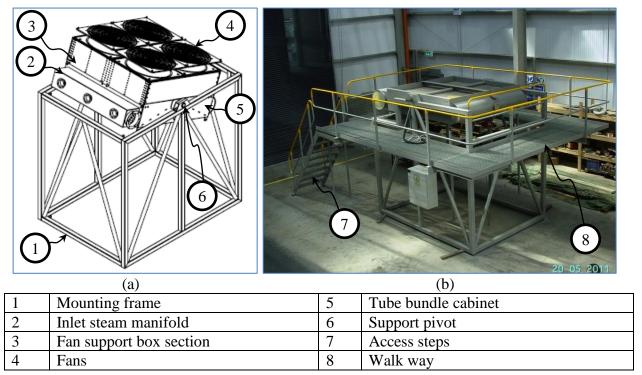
(a) CAD drawing of MACC prototype with support frame (b)MACC prototype mounted on frame with access steps and walk way.
